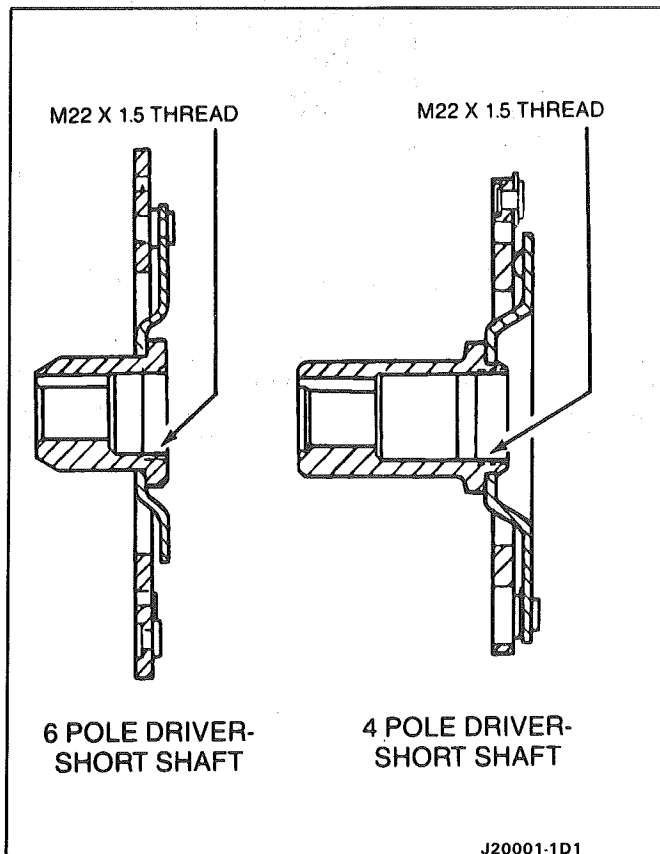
R-4 Compressor Clutch Drives - Short Shaft Design
